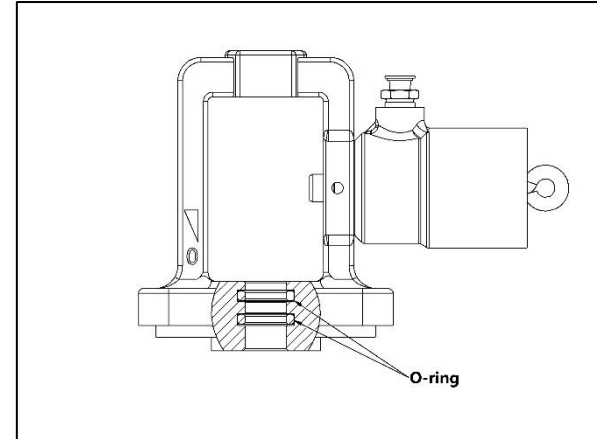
Replace the two O-rings inside the bonnet. Use suitable tool to reach the O-rings if needed.
